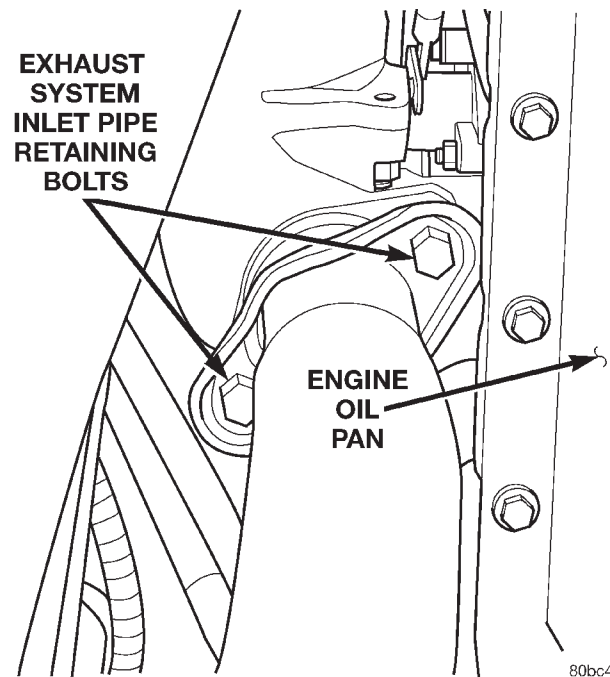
Exhaust System Inlet Pipe Retaining Bolts
